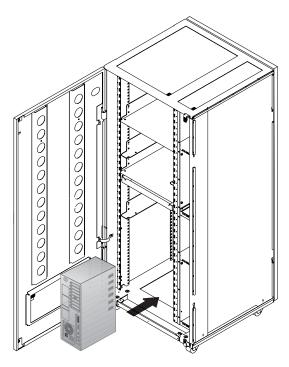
Installing the Service Processor Unit in the Controller Expansion (Rear Side)
